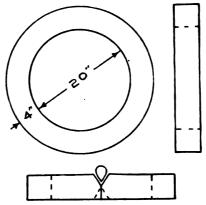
WELDING WITH WEDGE-SHAPED PIECE.
